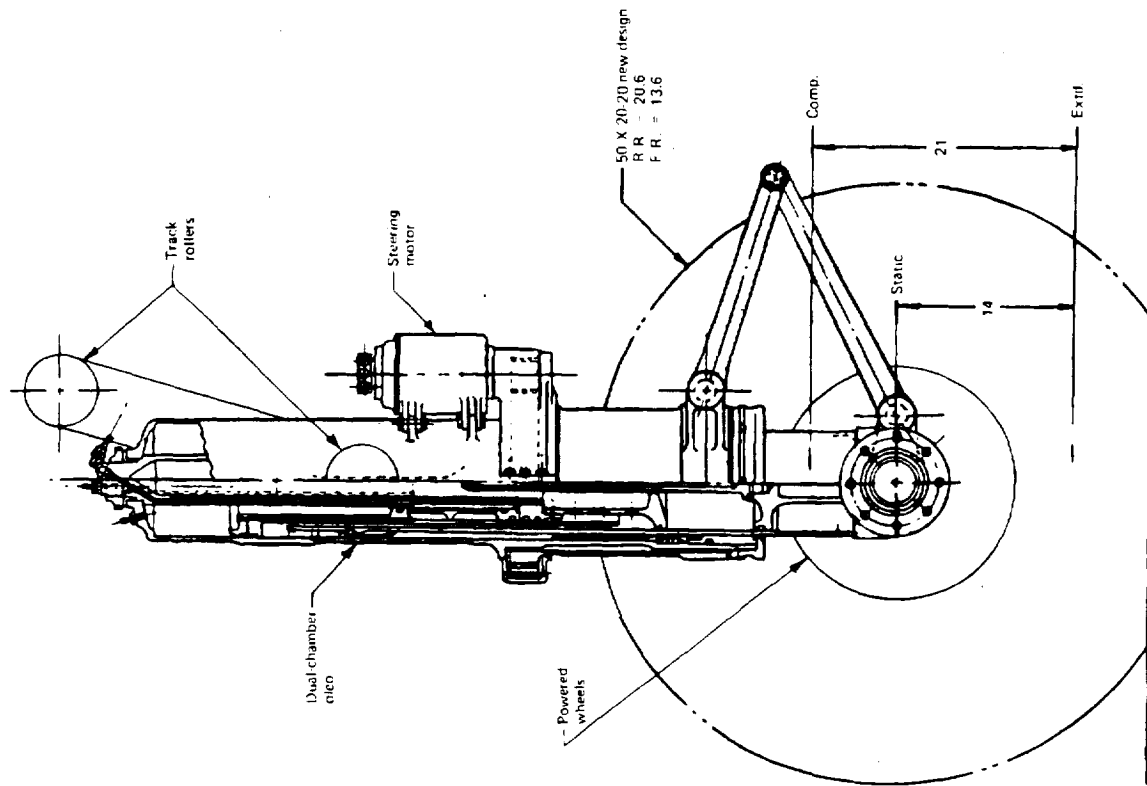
Shock Strut Assembly—Alt and Forward Landing Gears
